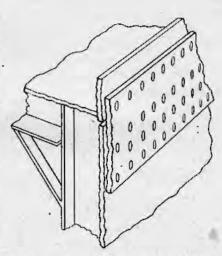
Sheer strake showing torch cut in sheer strake just beneath upper deck.
